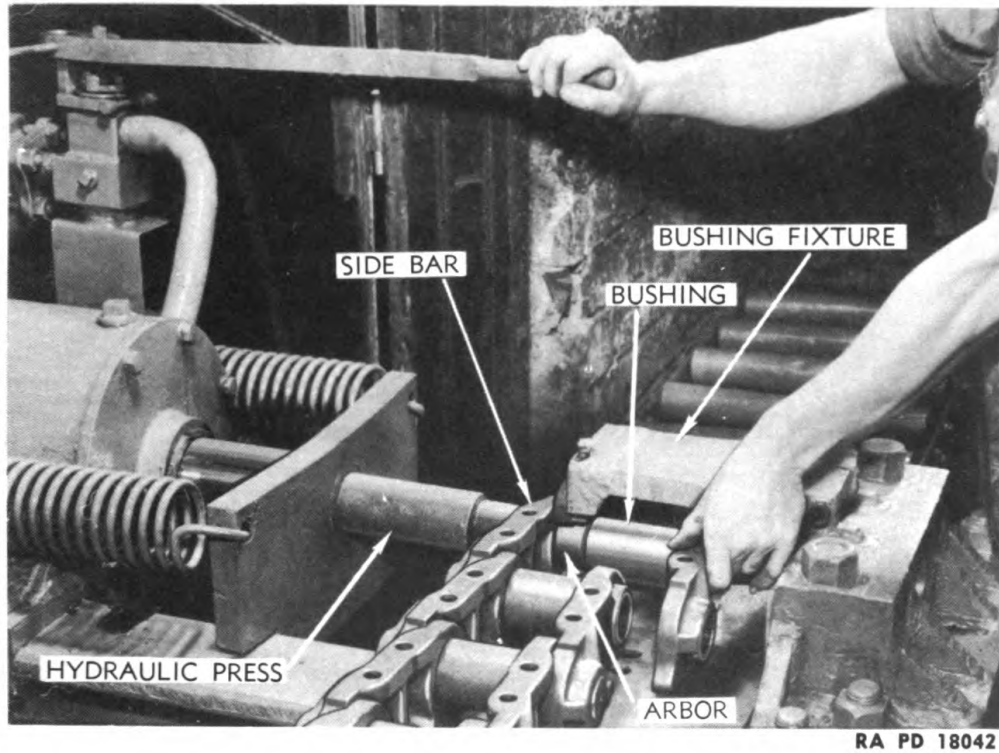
Removing Track Pin Bushing — Operation No. 1
